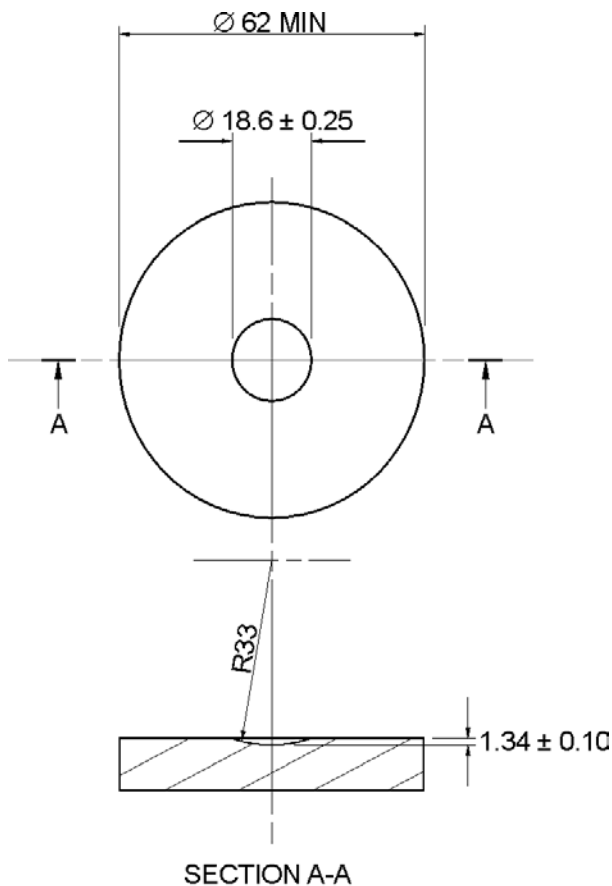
Deformation – Test Method ITF TB 03/01. Specification of platen design (to be used for both platens). All dimensions are given in millimetres.
